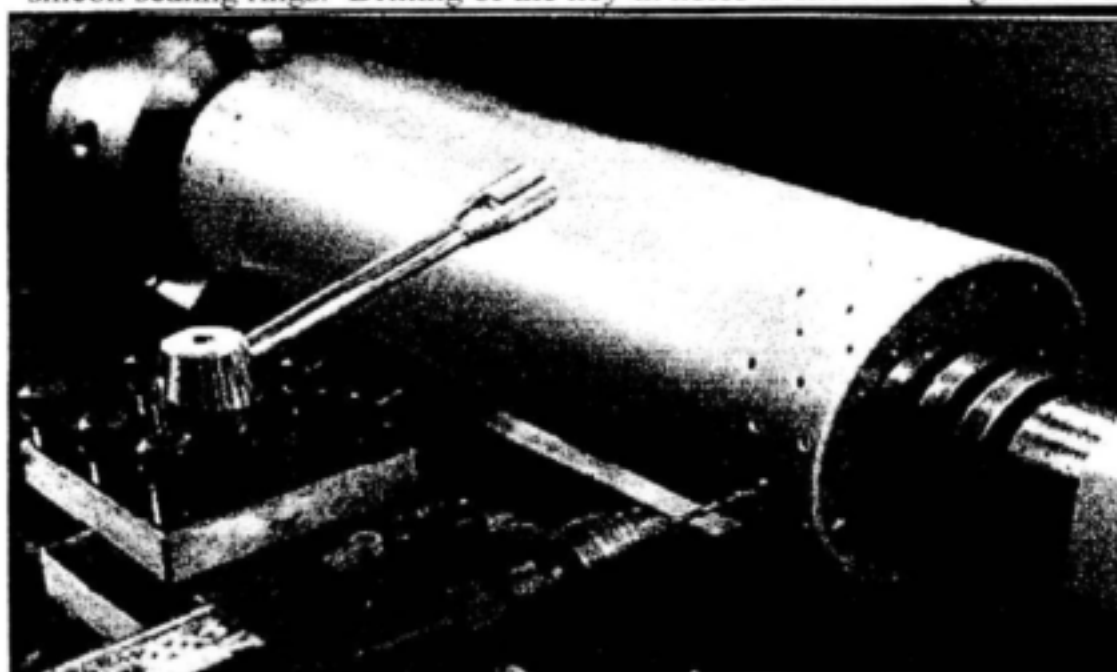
DRILLING OF KEY-IN HOLES IN A CENTRE GAP LATHE OF A SHROUD FOR A 200⁰ MM CAPILLARY MEMBRANE MODULE
